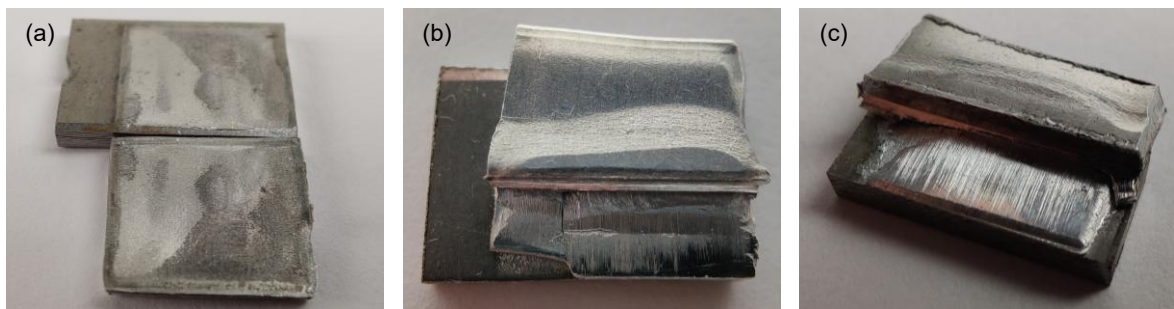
Welded specimens after tensile shear testing (welding direction: right to left): (a) Shear or sliding failure (top: DC04, bottom: AA6016-T4); (b), (c) Shear failure in the aluminium material (top: AA6016-T4, bottom: DC04).
